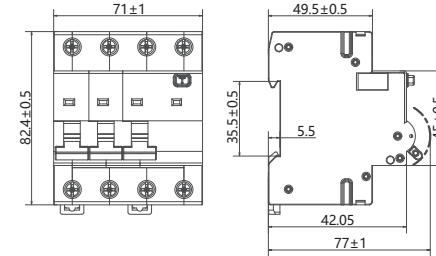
AUB7HLM-3P+N Outline Installation Dimensional Drawing
